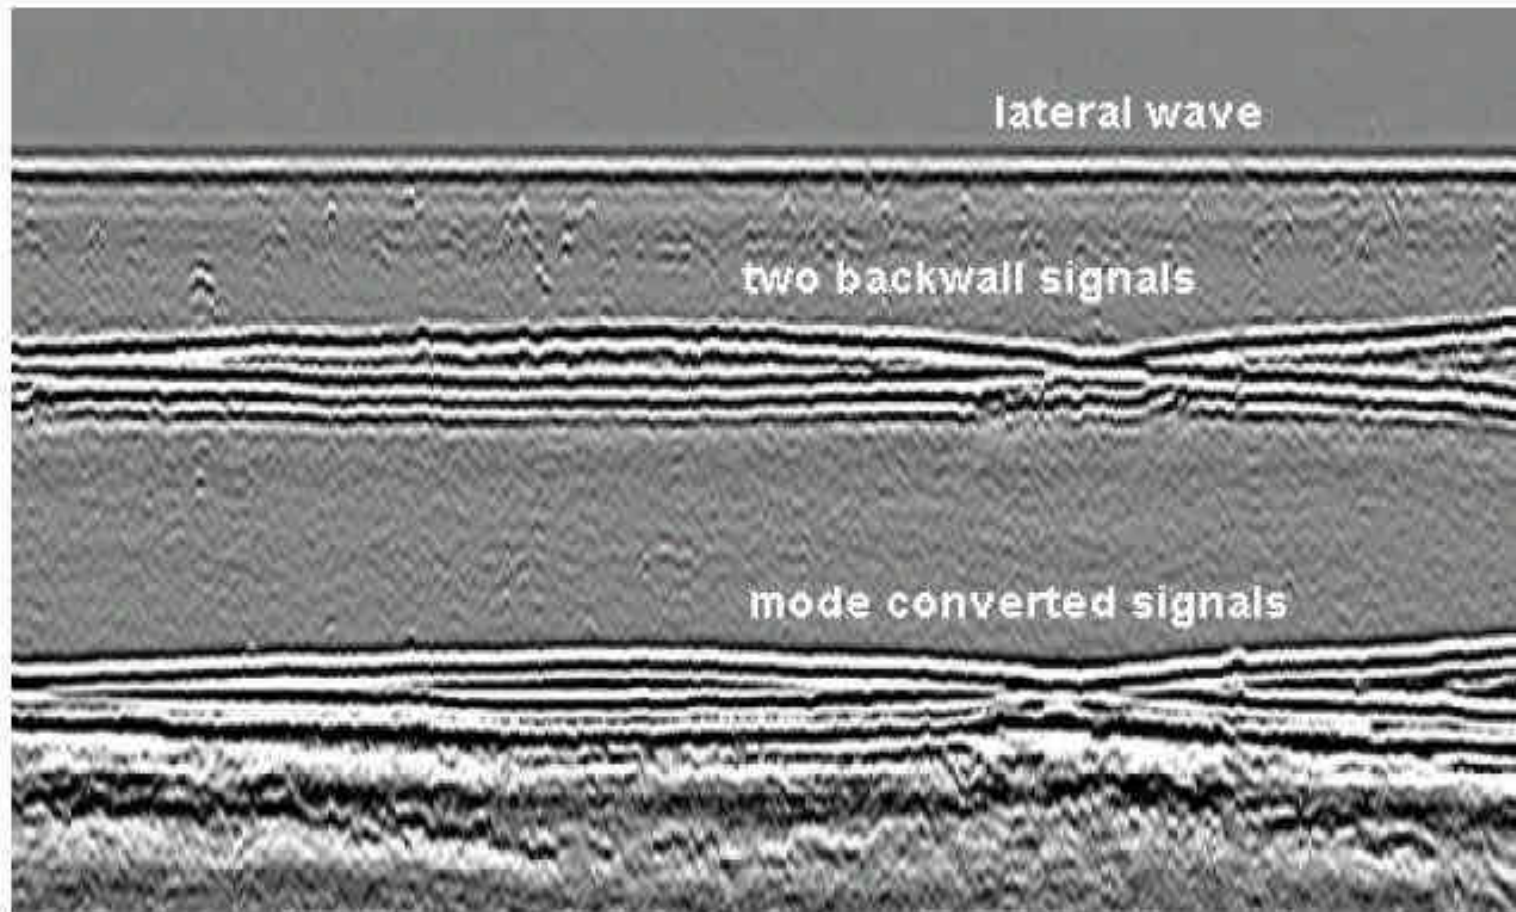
Image of misalignment in circumferentially welded pipes.
